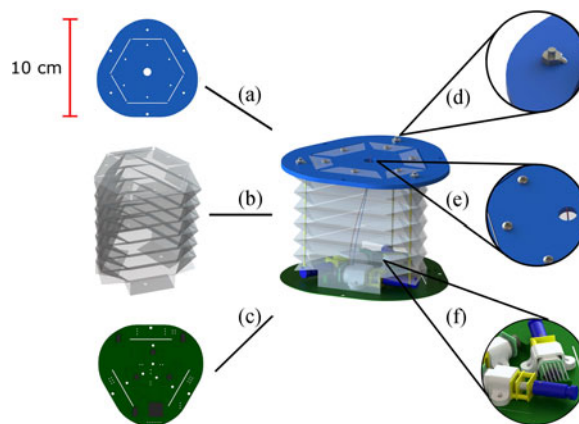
The individual modules used to construct the OriSnake. (a) Acrylic Plate, (b) 3-part origami bellows, (c) control board, (d) cable mounting screw, (e) bellows mounting screws, (f) interior motor mounts.
